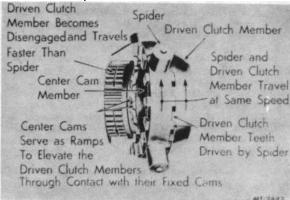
Forward Right-Hand Turn (Cross Sectional View)
